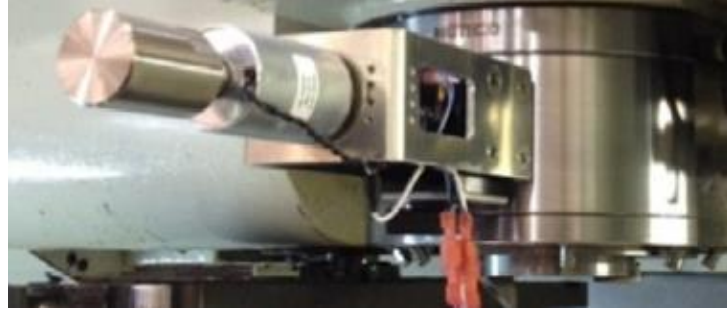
measurement carried out by (Vogl & Donmez, 2015) on the a spindle (front bearing housing)
